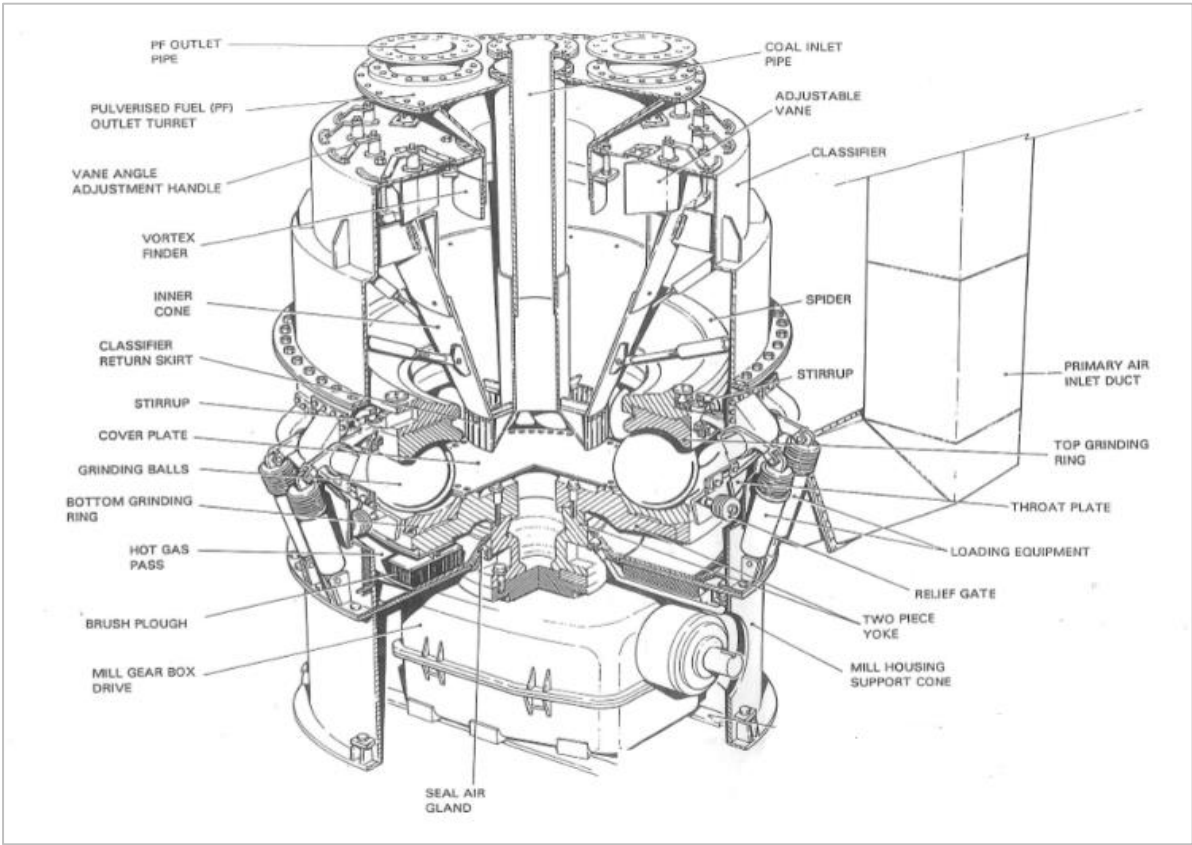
Mill cross-section overview (Babcock 8.5 E-type Mill)
